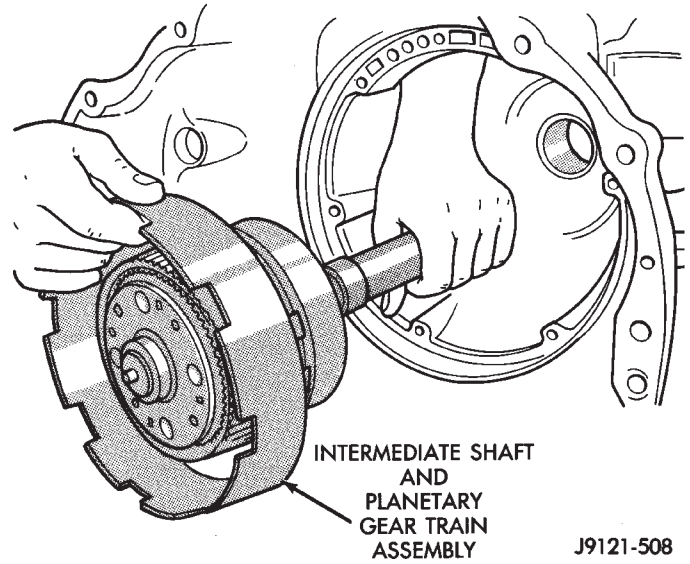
Removing Intermediate Shaft And Planetary Geartrain Assembly—46RH
